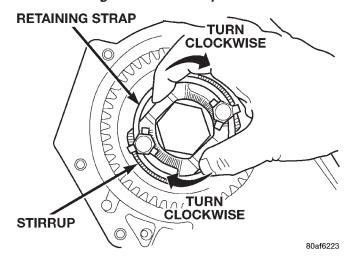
Turn Stirrup Clockwise Against Flats Of Output Gear Retaining Bolt
